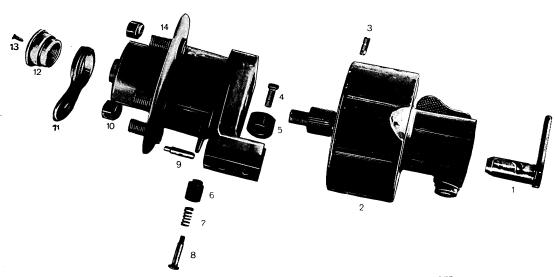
SPRING DEVICE WITH COIL SPRING — DISMANTLED
